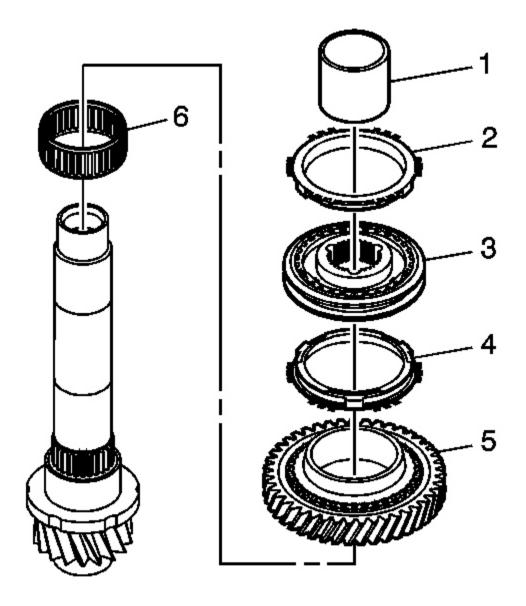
5th Gear Blocking Ring, Bearing Collar, Reverse Gear & Caged Needle Bearing Courtesy of GENERAL MOTORS CORP.
